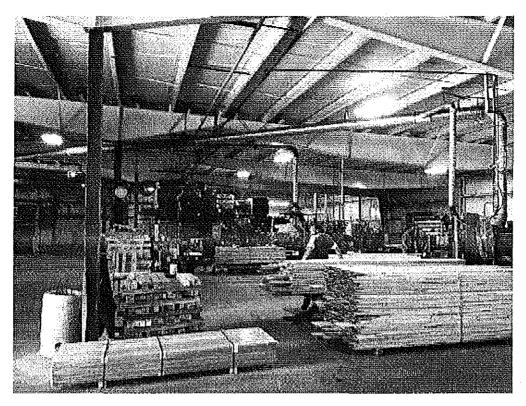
(7/24/2014): Interior ductwork of waste handling collection system.
